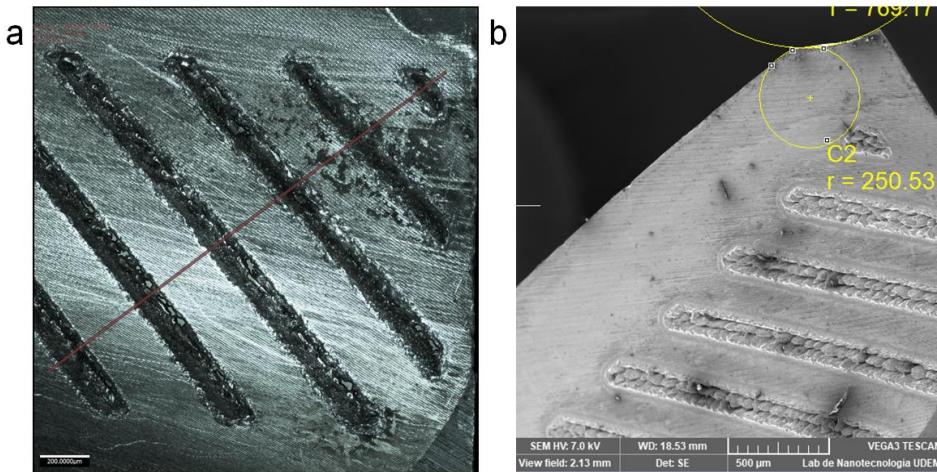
Image of an endmill with  $45^\circ$ -channel texture (a) before and (b) after the machining experiments.
